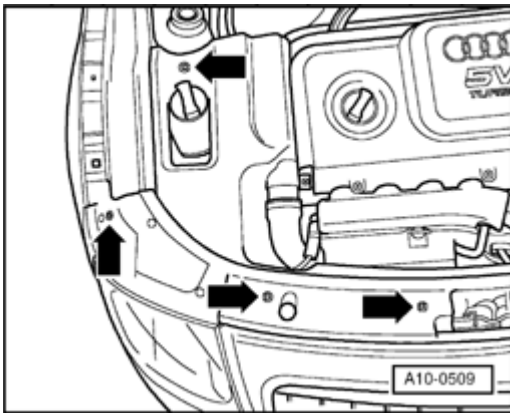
Removing Covers At Lock Carrier And Above Coolant Expansion Tank
